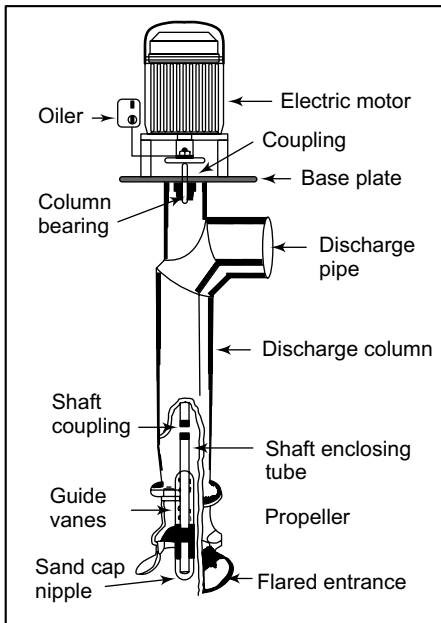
View of propeller pump with the propeller and lower shaft assembly exposed
